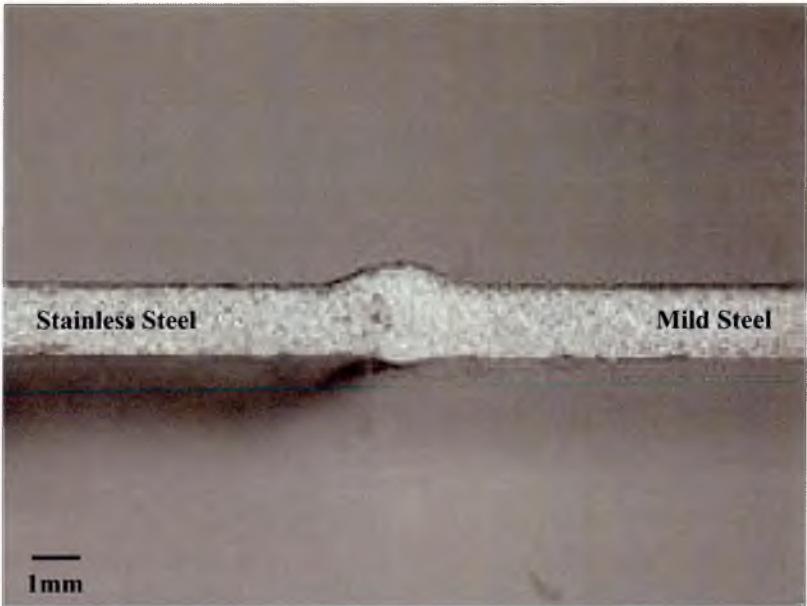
Example of the joint fit of similar thickness LHW butt joints.
